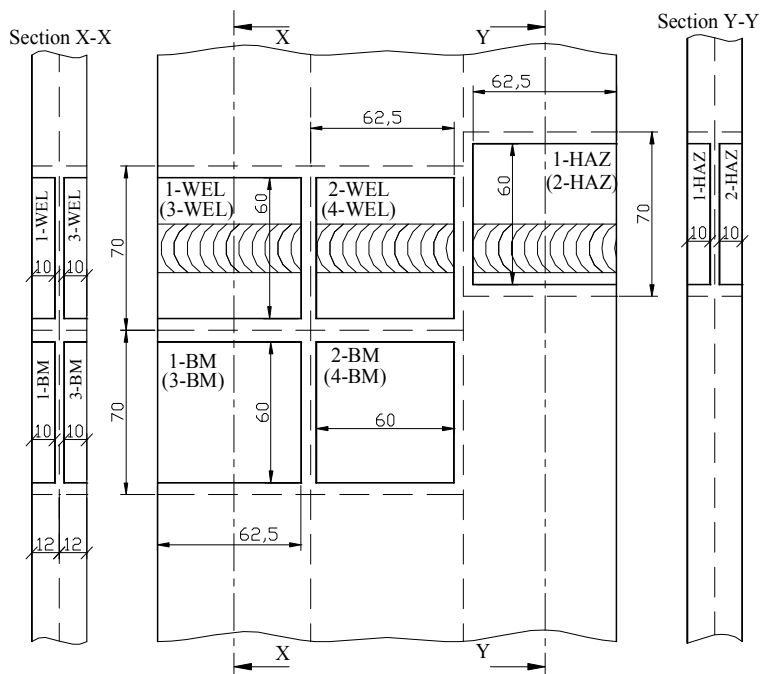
Locations of the CT specimens at the welded plate (dimensions in mm)
